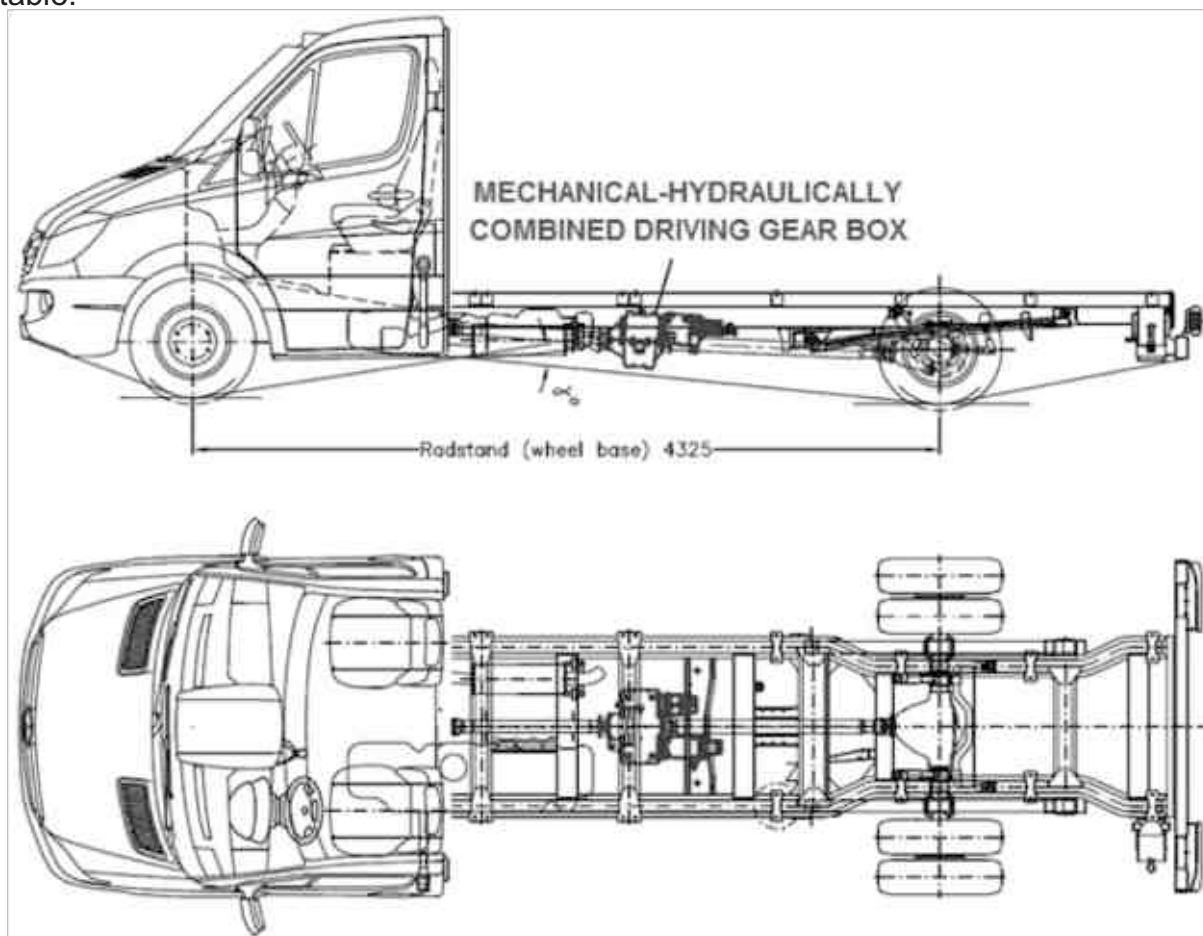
Mechanical-hydraulically combined driving gear box. The requirement for Mercedes Sprinter
